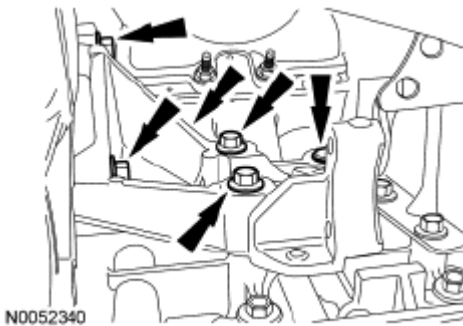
Locating Bolts & Power Transfer Unit (PTU) Support Bracket
